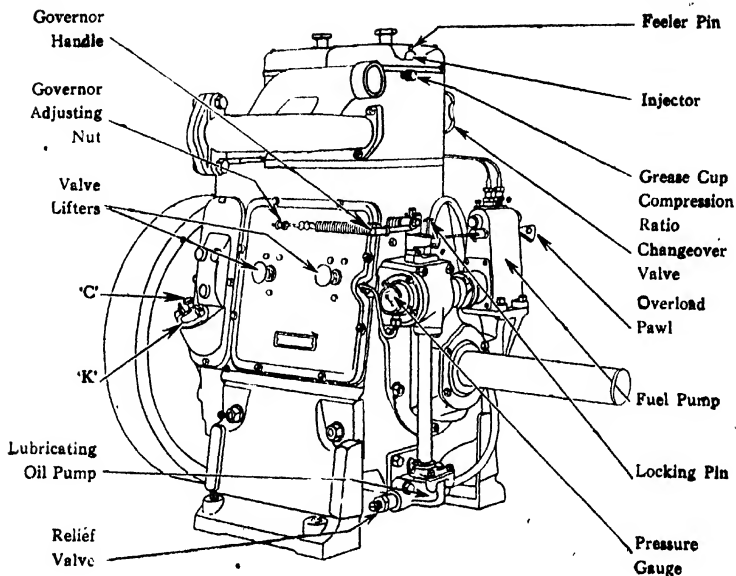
A TYPICAL SOLID-INJECTION DIESEL ENGINE
